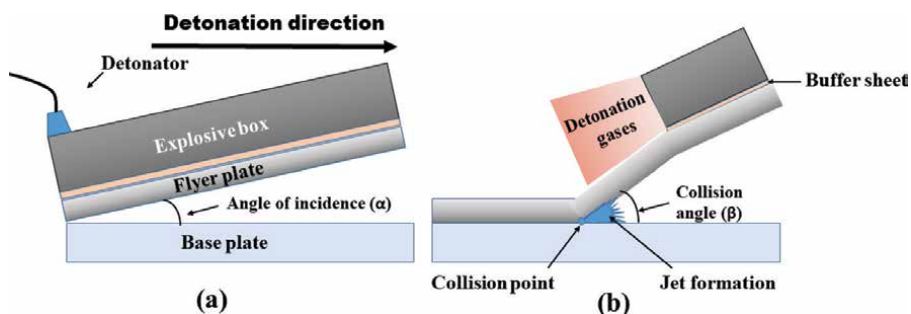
Schematic diagram of explosive welding process in inclined set-up a) initial set-up, b) after the explosion has initiated.
